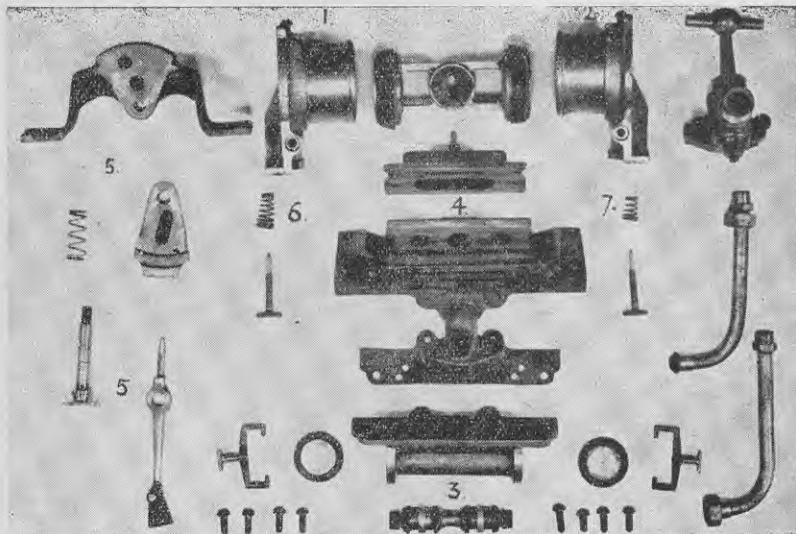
(b).—The parts of the pulsator shown in Fig. 11(a).
